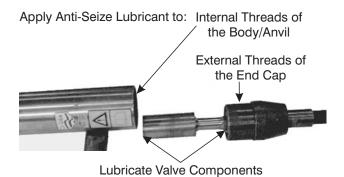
Prepare Tail Assembly and Body Anvil for Assembly.
